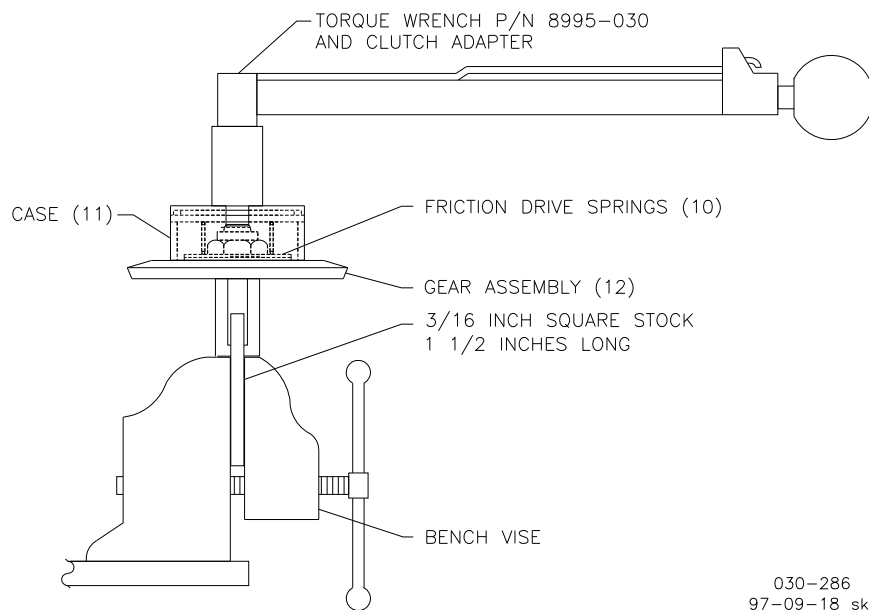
Method of Holding Gear While Removing Screw (9) and also for Setting Torque
